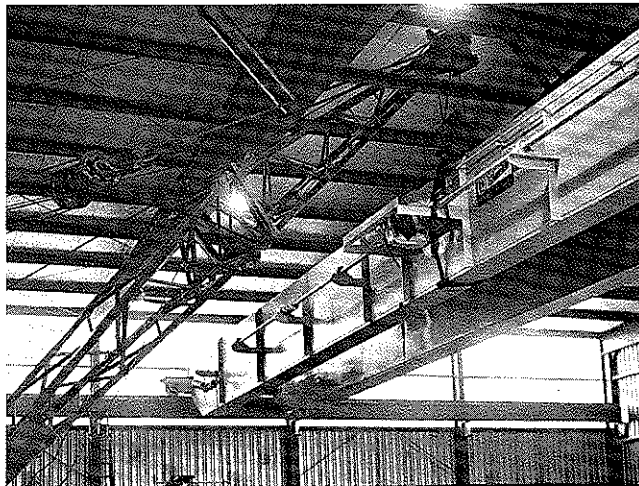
Securing Front Girder by Fitted Bolts to End Trucks.
